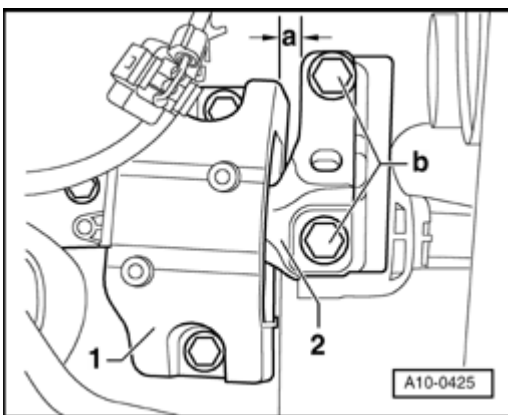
Identifying Engine Supports Bolts & Distance Between Engine Console & Support Arm
